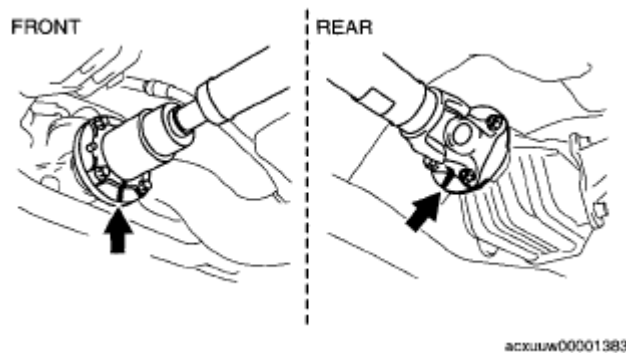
Locating Alignment Marks On Companion Flange (Front) And Constant Velocity Joint
